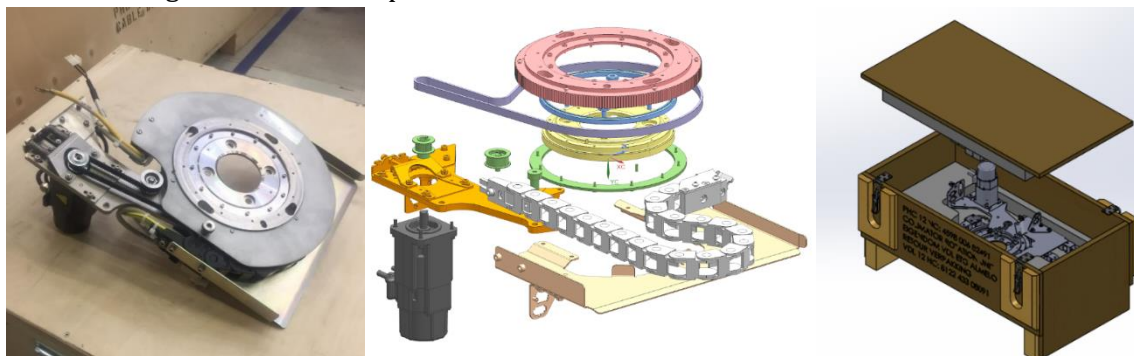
CORO: Picture (Left), Exploded View (Middle), On Dedicated Pallet (Right)
